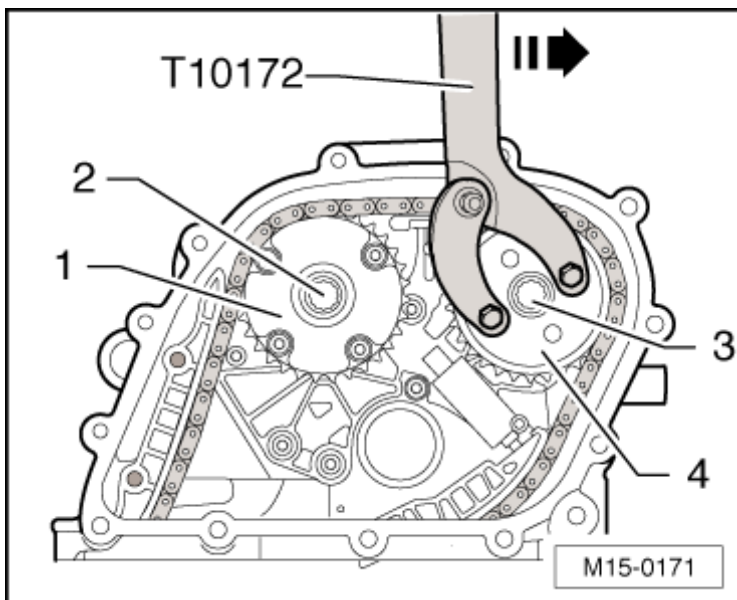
Identifying Modified Counterhold Tool Touareg V10 T10172 Attached On To Chain Sprocket For Exhaust Camshaft
